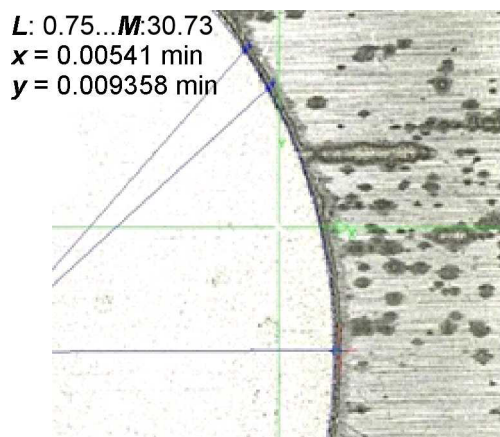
Specimen showing the inner circle (phototool size) and the outer circle (extra machining)
